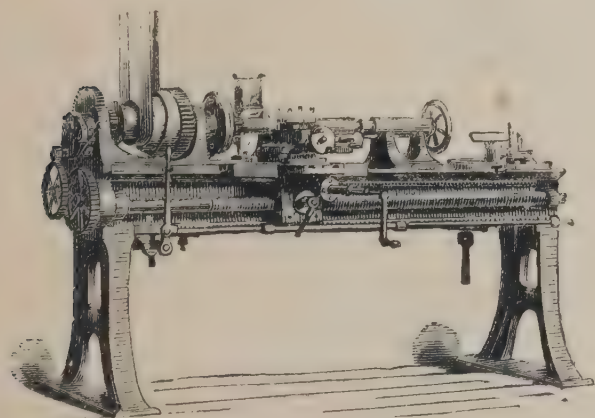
CENTRE DOUBLE-GEARED LATHE.
